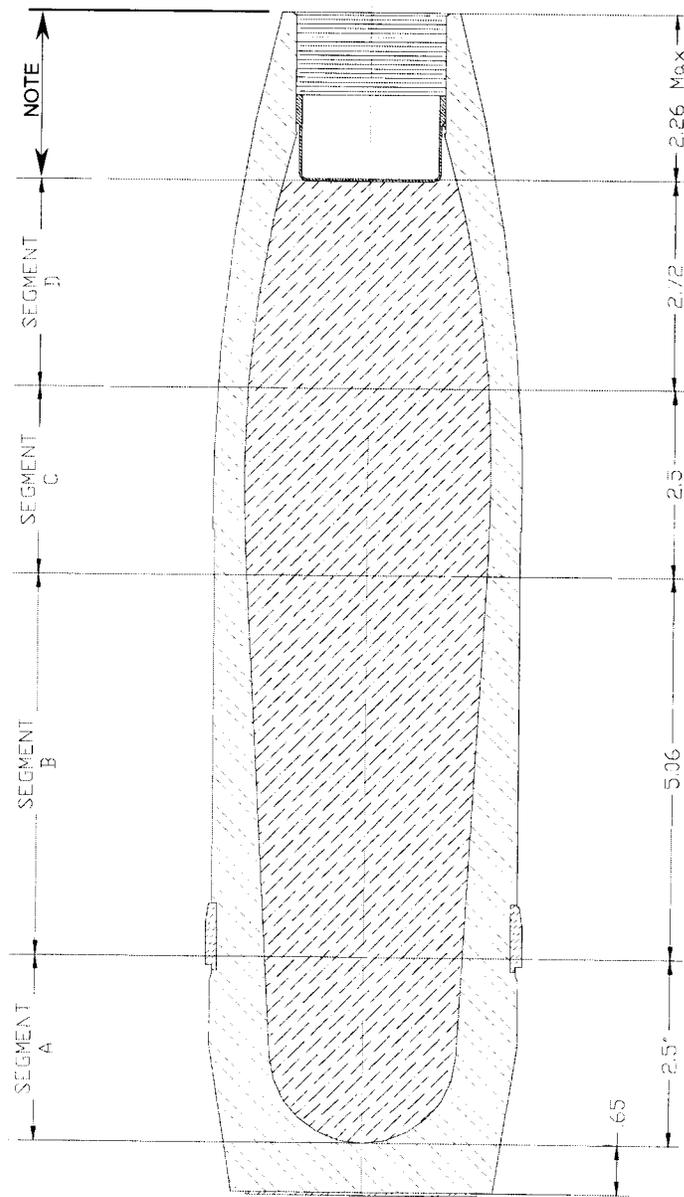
Explosive Charge Segment Definitions for Checking Refurbished M1 Projectiles (18894-20039982)
